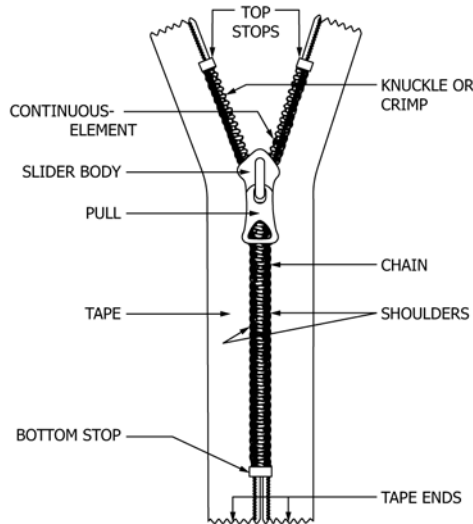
Principle Parts of Slide Fasteners—Continuous Element Slide Fastener
